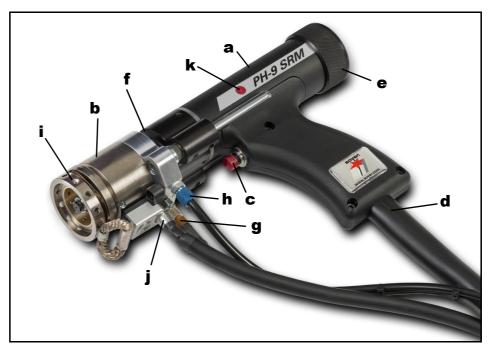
PH-9 SRM<sup>12</sup>+G stud welding gun
